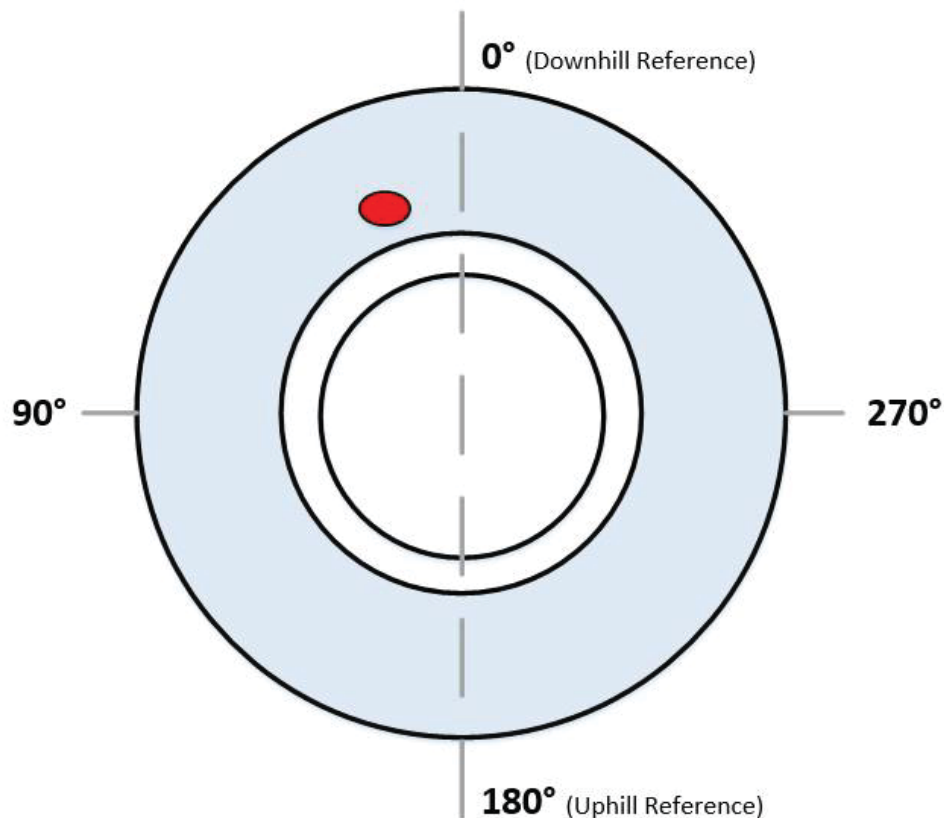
Location of Weld Surface Indication (Representative)
